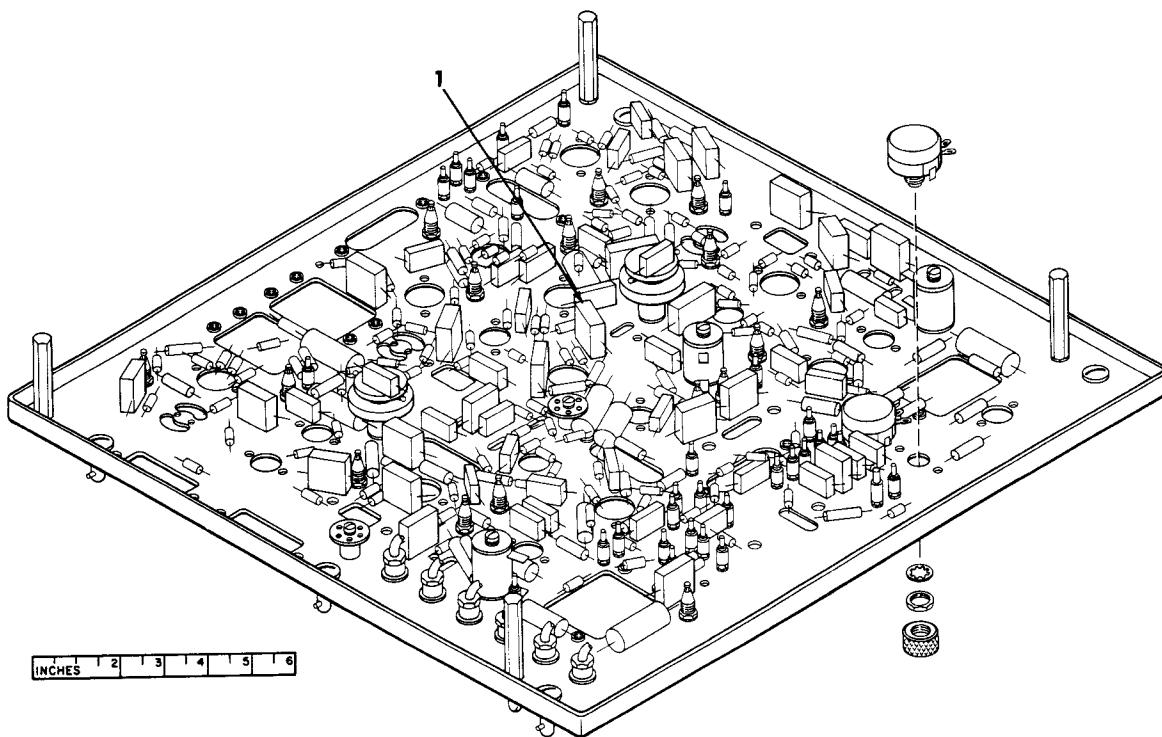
Synchronizer, electrical (9983937)—partial exploded view
